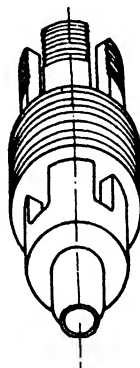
Showing the assembly of slotted point-holder and segmental ram.
